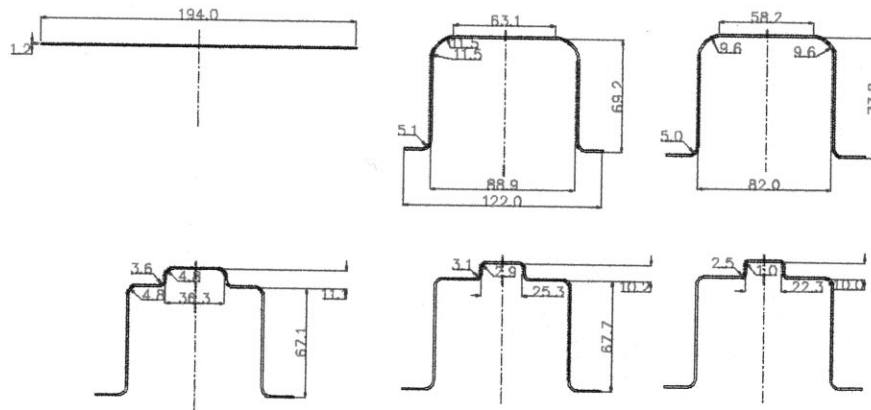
Sequence drawing for the deep drawing part of the 'motor housing': the output of Pro_Deep.
